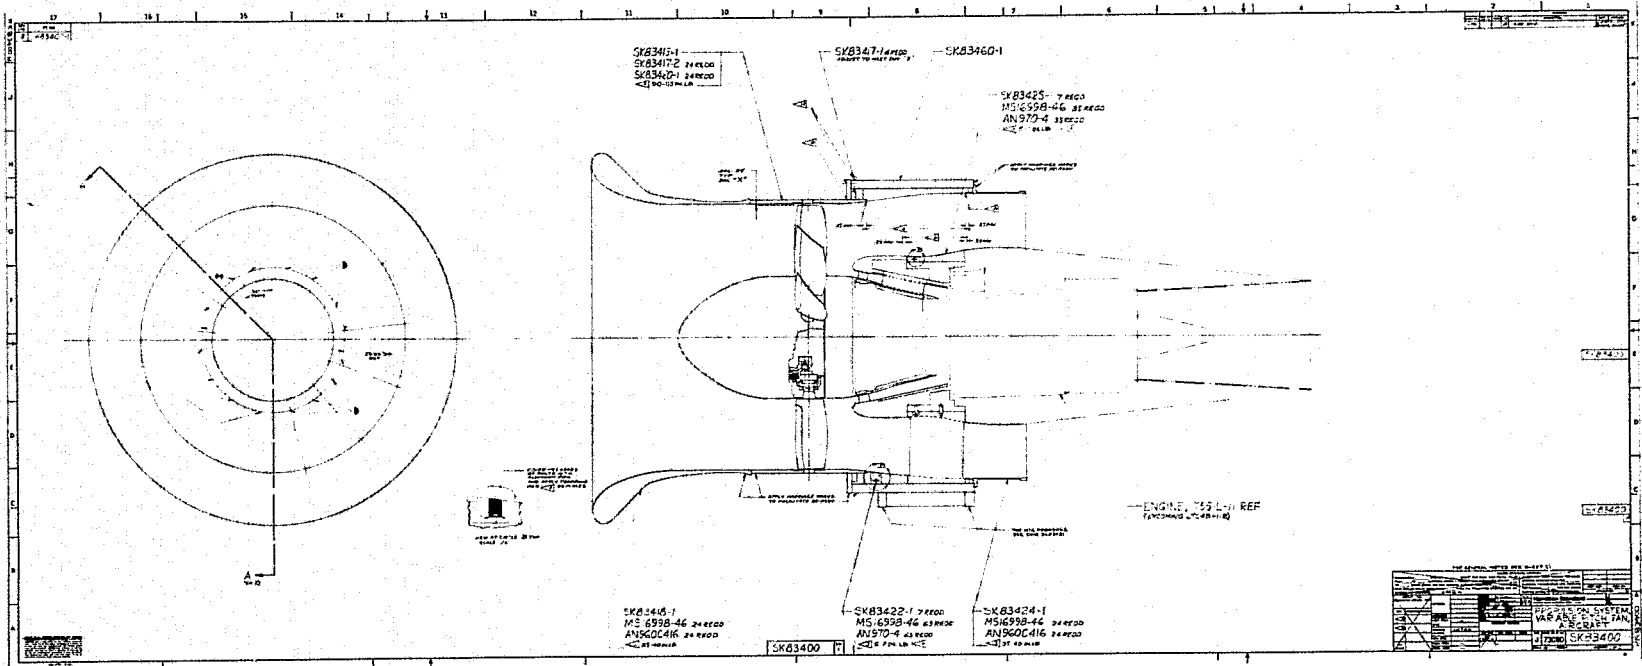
Q-FAN ASSEMBLY - SHEET 1
